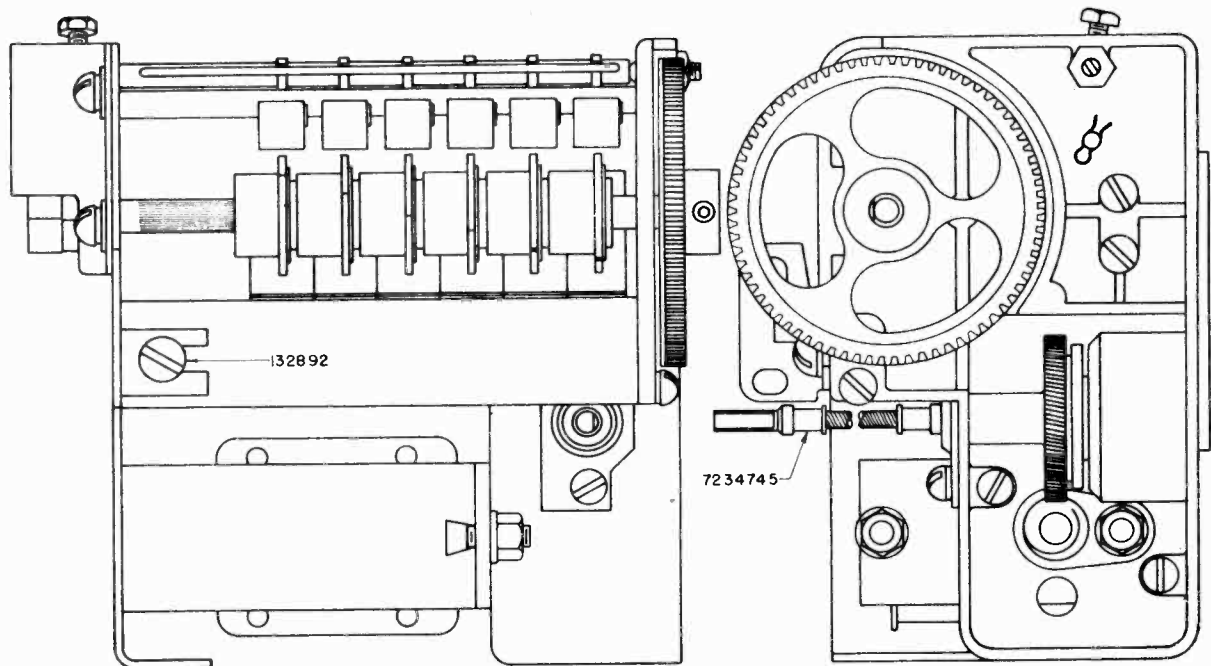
PARTS LAYOUT--DELCO-MATIC TUNER
